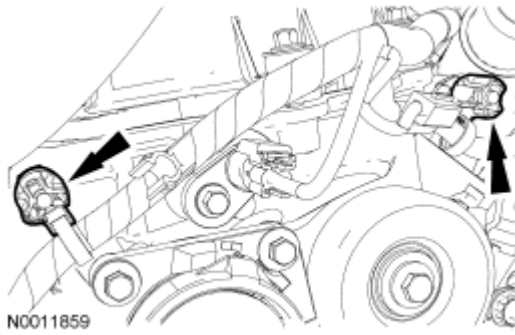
Locating Engine Wiring Harness Pin-Type Retainers
